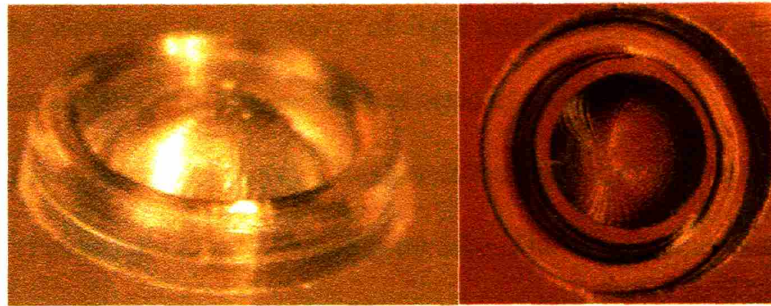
Side view and top view of microlens and alignment ring around the microlens.
